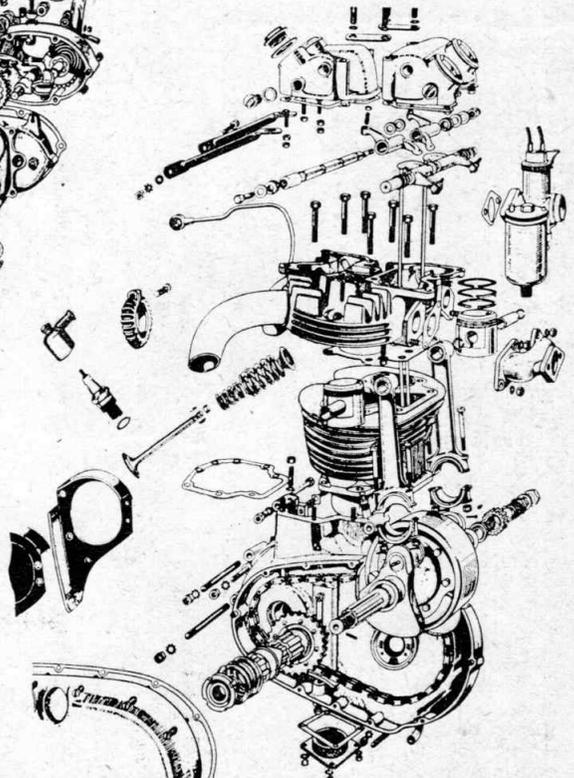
and Fig. 2.—A7 engine and gearbox details, up to Engine No. ZA7-11192.
